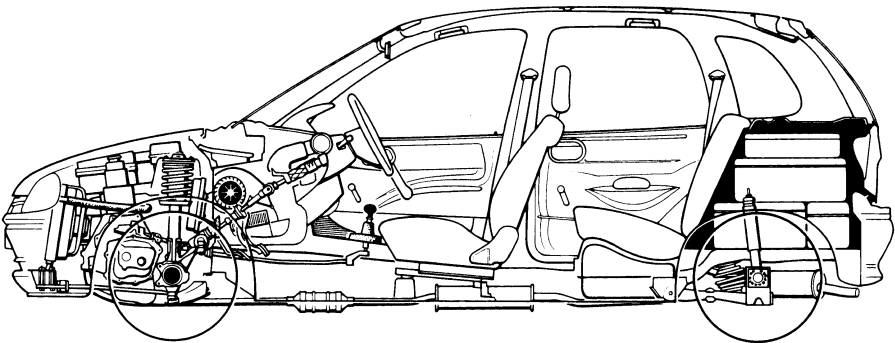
Compact power train unit on the Vauxhall Corsa (1997). The engine is transverse mounted with the gearbox on the left. The McPherson front axle and safety steering column can be seen clearly.
